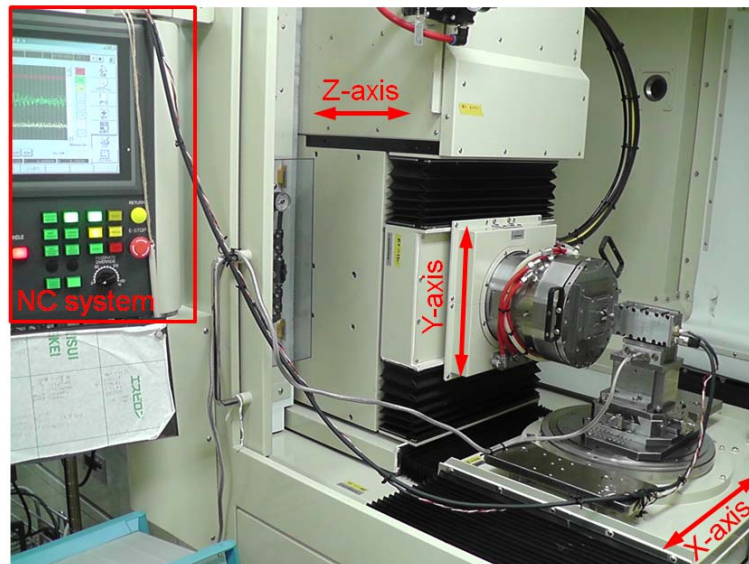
Ultra-precision machine tool ASP01UPX made by Nachi-Fujikoshi
